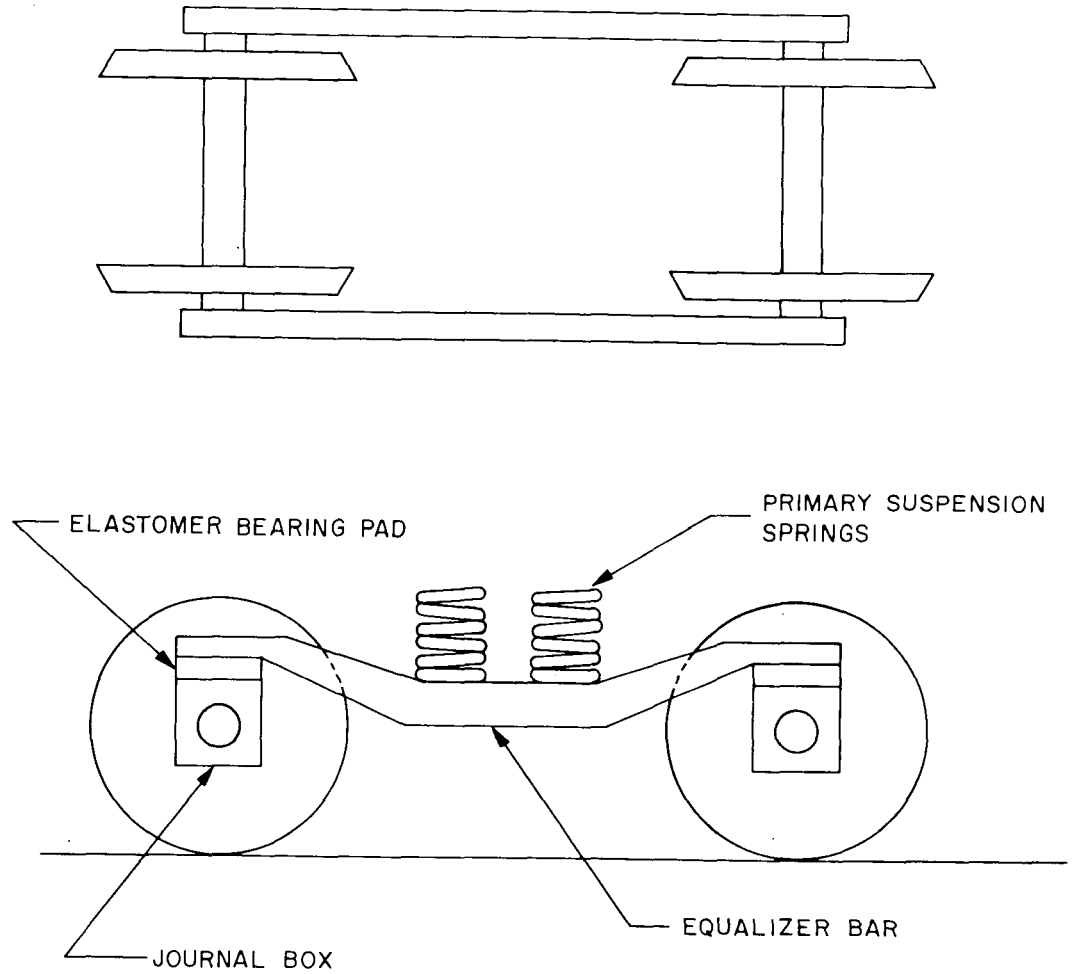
Typical Assembly of Wheel Axles and Equalizer Bars in Transit Truck Designs
